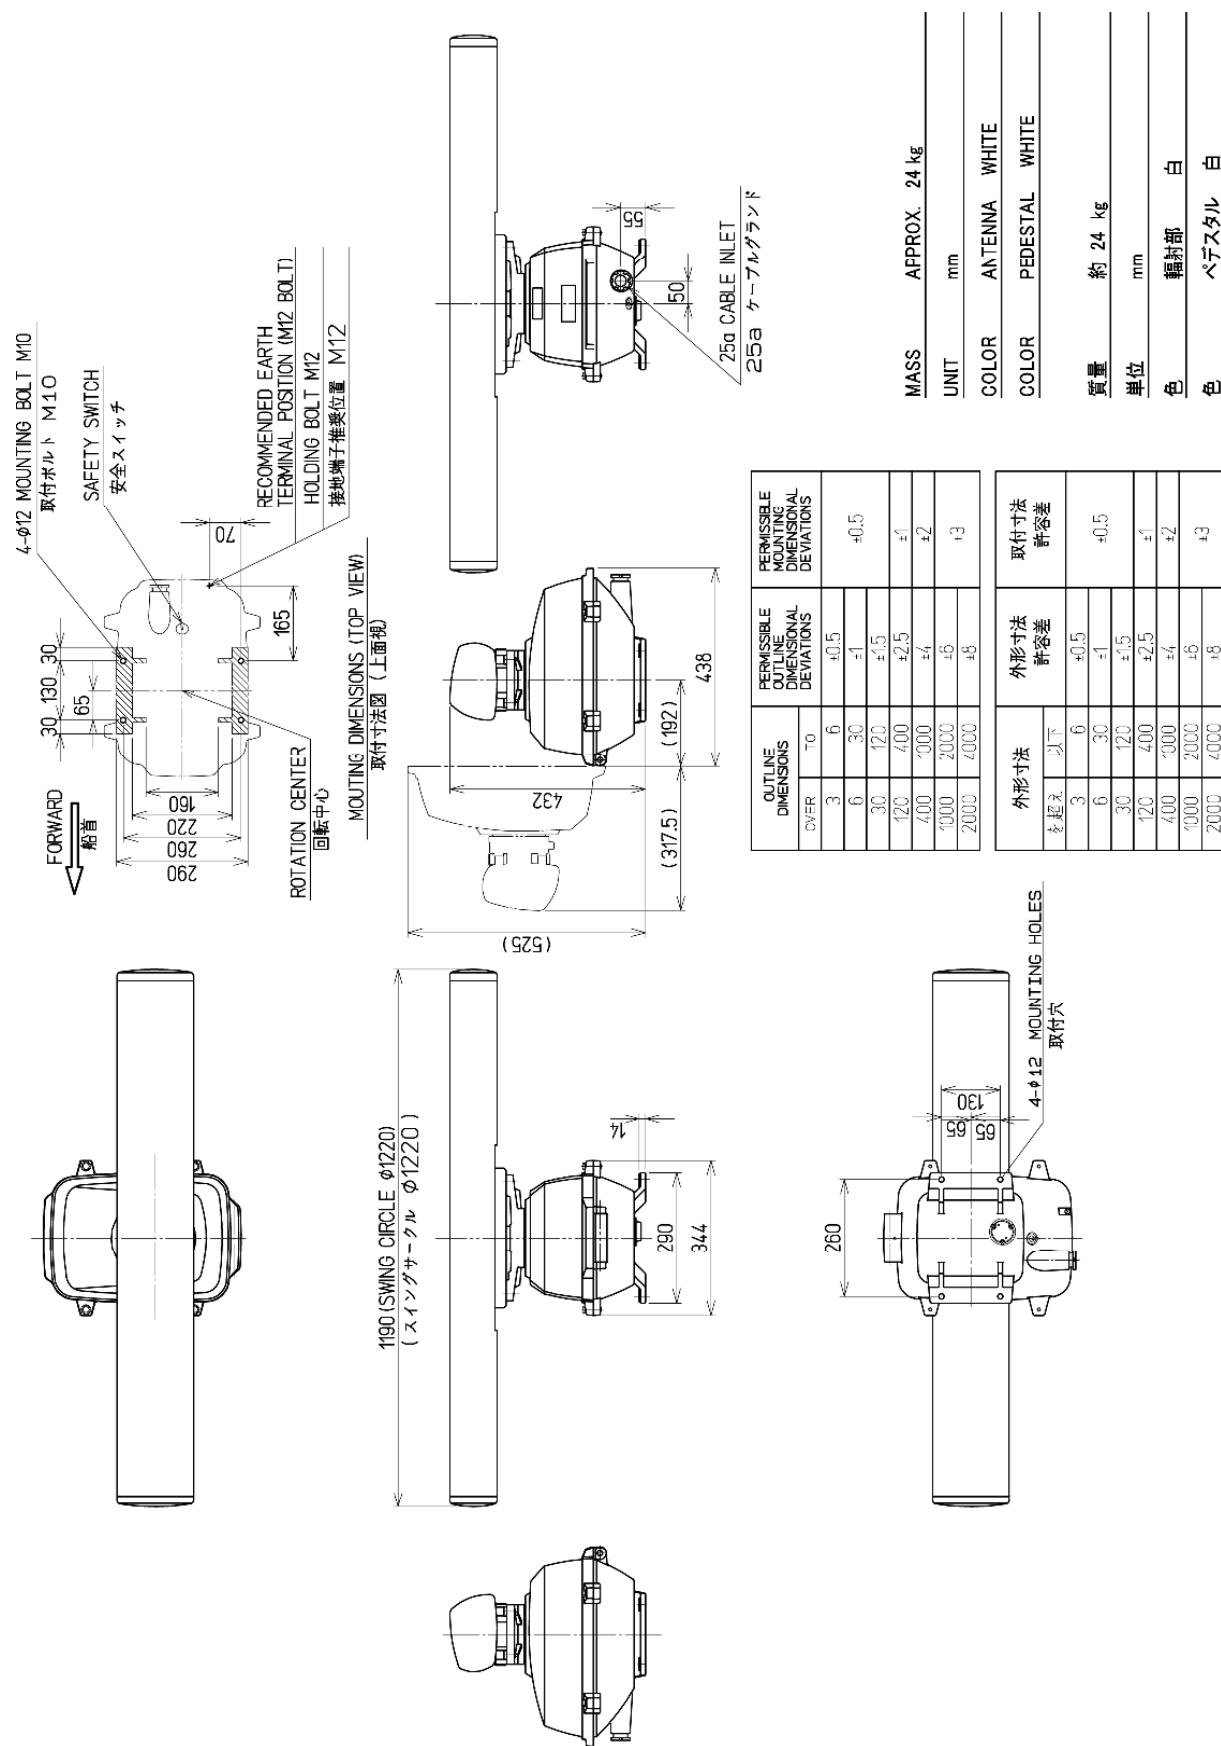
Exterior Drawing of Scanner Unit, Type NKE-2062/HS
